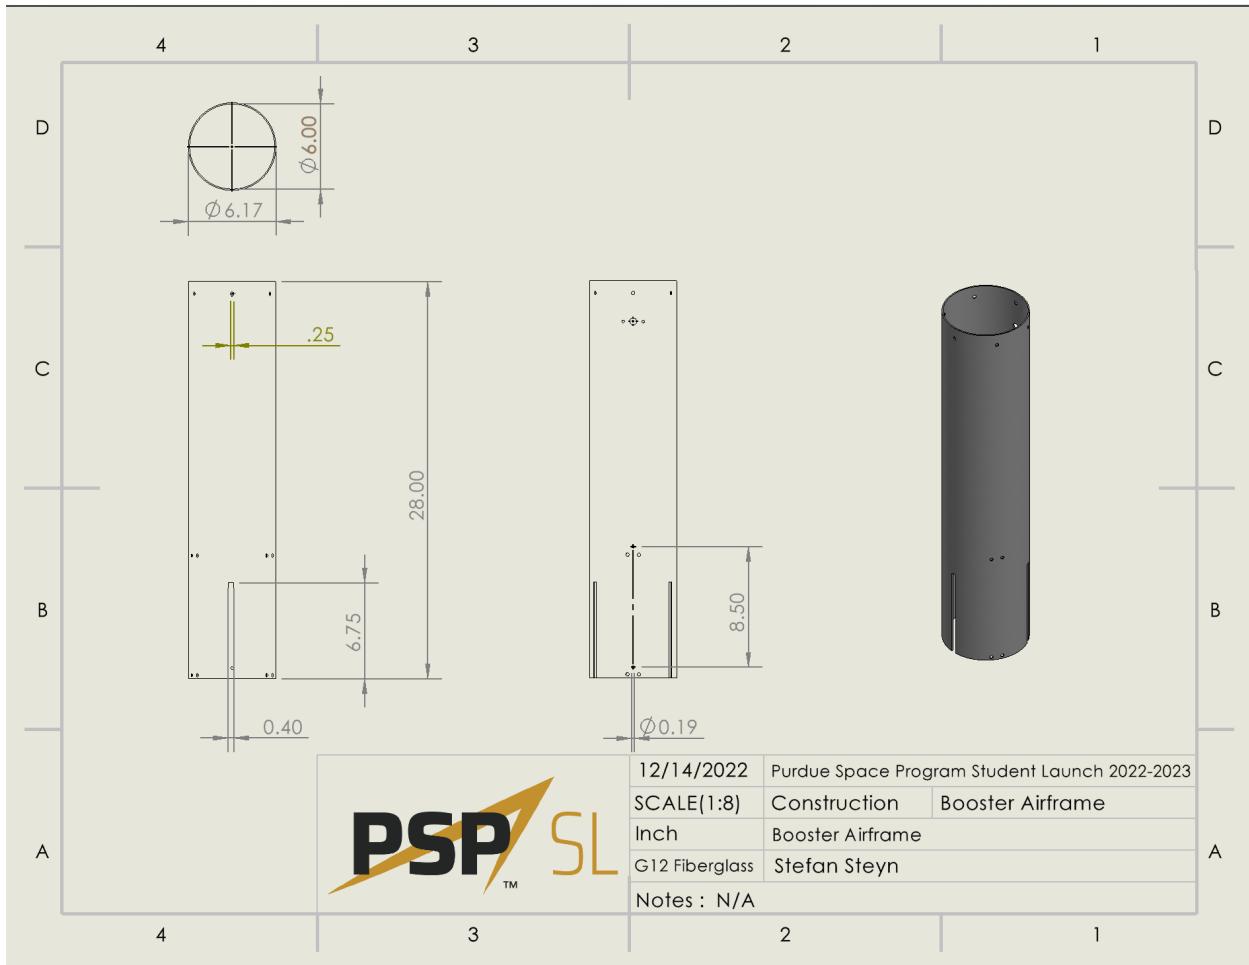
Technical Drawing for Booster Airframe
